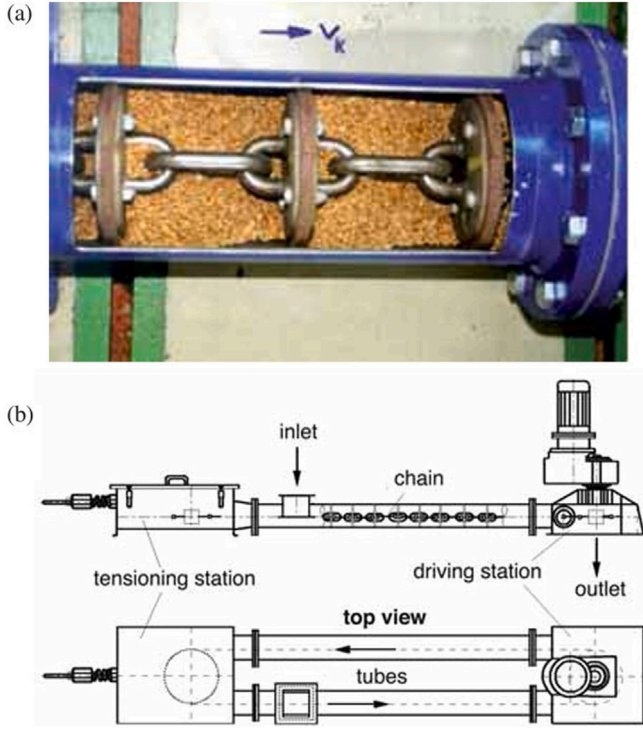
Chain tube conveyor; (a) transportation of wheat; (b) schematic view of a horizontal tube chain conveyor. (Adapted from [124,126].)
